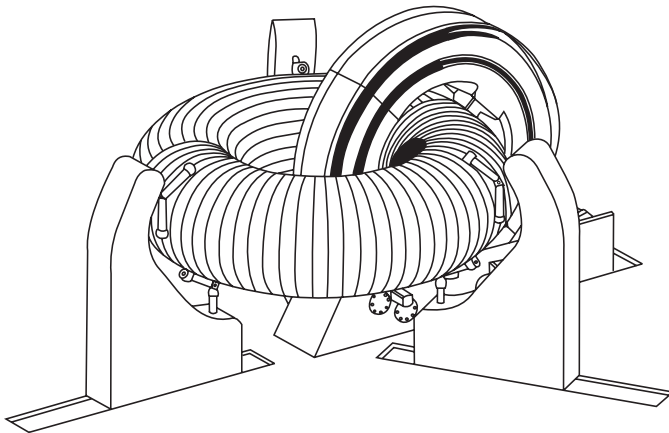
Concept drawing for the fiber-placement machine's main axis. (Courtesy M. Torres)
